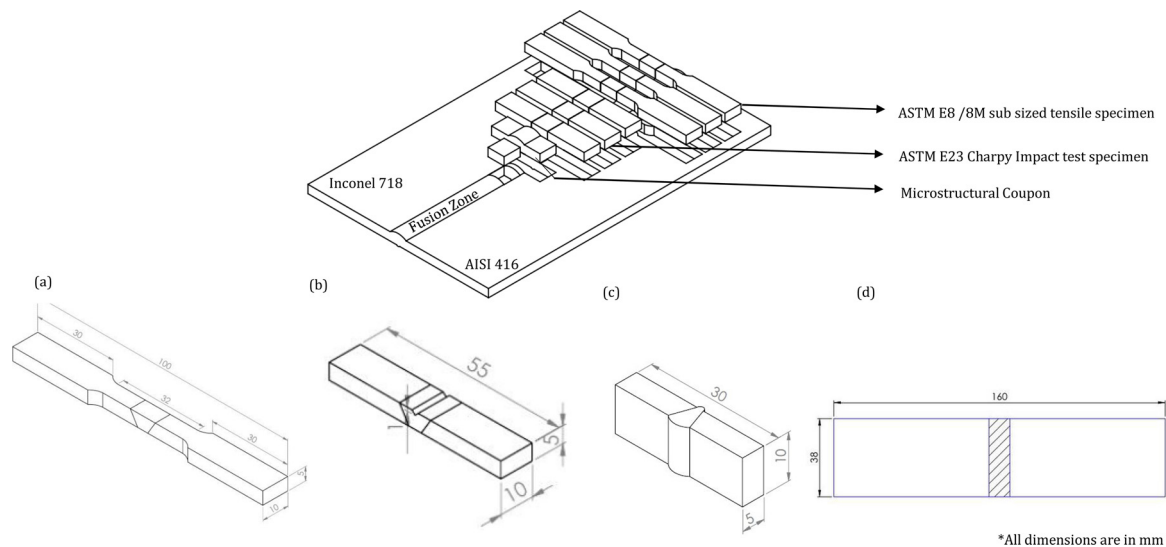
Schematic representation of butt joint and various test specimens used (a) Tensile Test specimen (b) Impact test specimen (c) Microstructural coupon (d) Bend test specimen.
